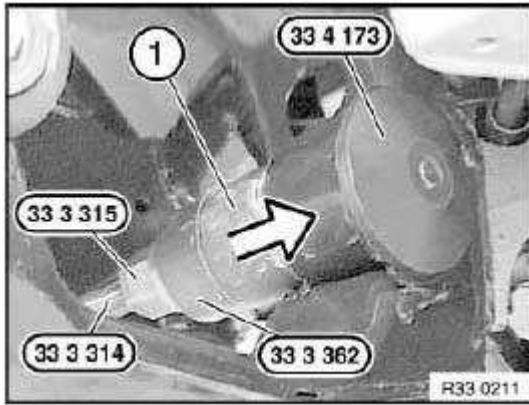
Special Tool (33 4 173), (33 3 315) And (33 3 362)
